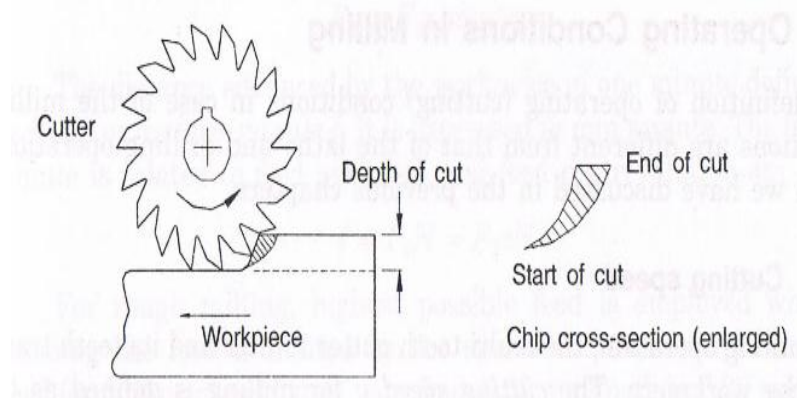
Up milling operation and the chip cut by a cutter tooth
